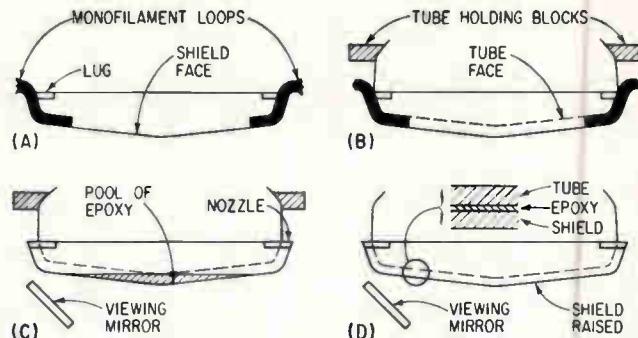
Fixture provides space between tube and shield. After bonding resin is inserted, shield is raised to complete lamination
